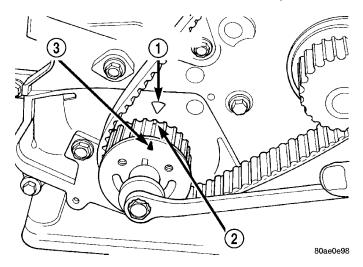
Adjusting Crankshaft Sprocket for Timing
